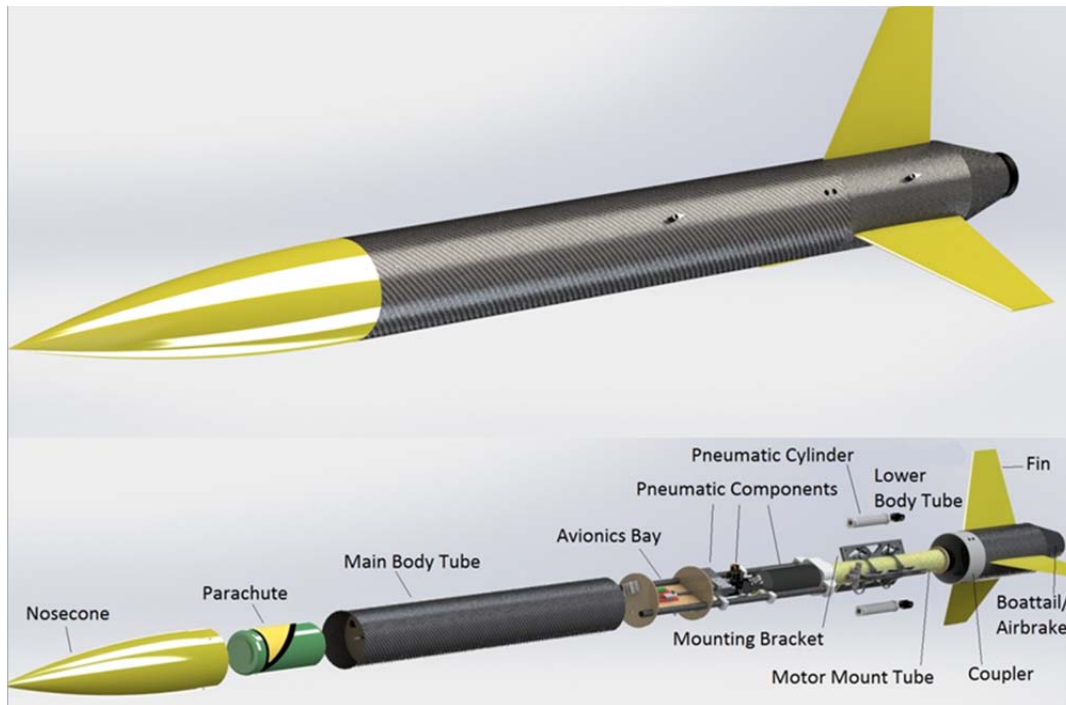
Fully assembled view of the rocket (top) and an exploded view of how the rocket comes apart (bottom).
